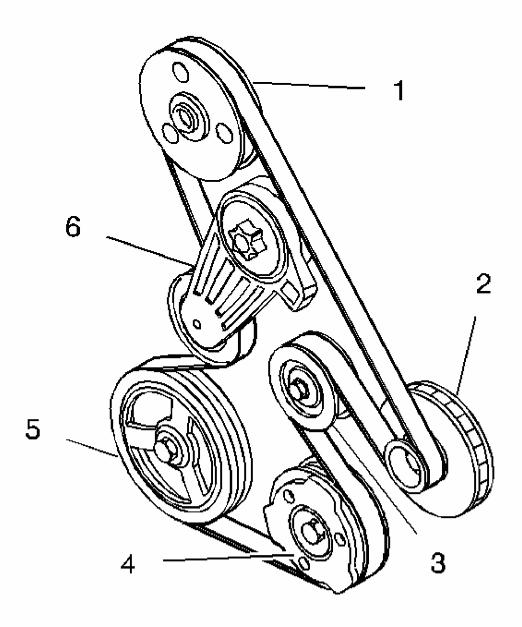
Identifying Power Steering Pulleys, Drive Belt & Drive Belt Tensioner Courtesy of GENERAL MOTORS CORP.
